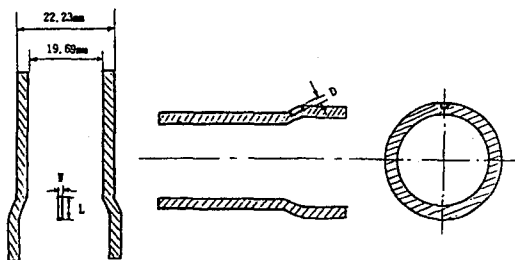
Schematic Drawings of Roll Expansion of the Tube
